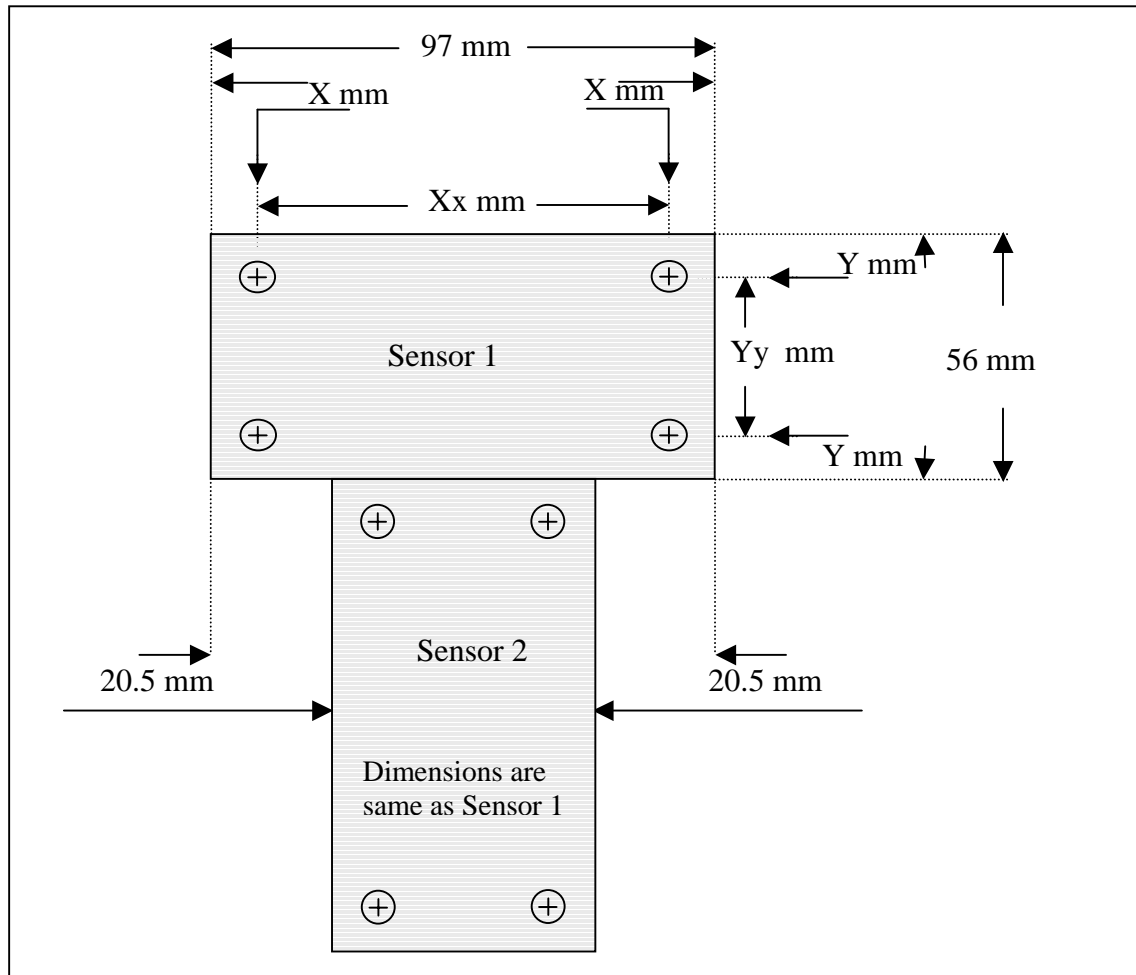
Magnetometer PCB's Initial Stack Assignment.
